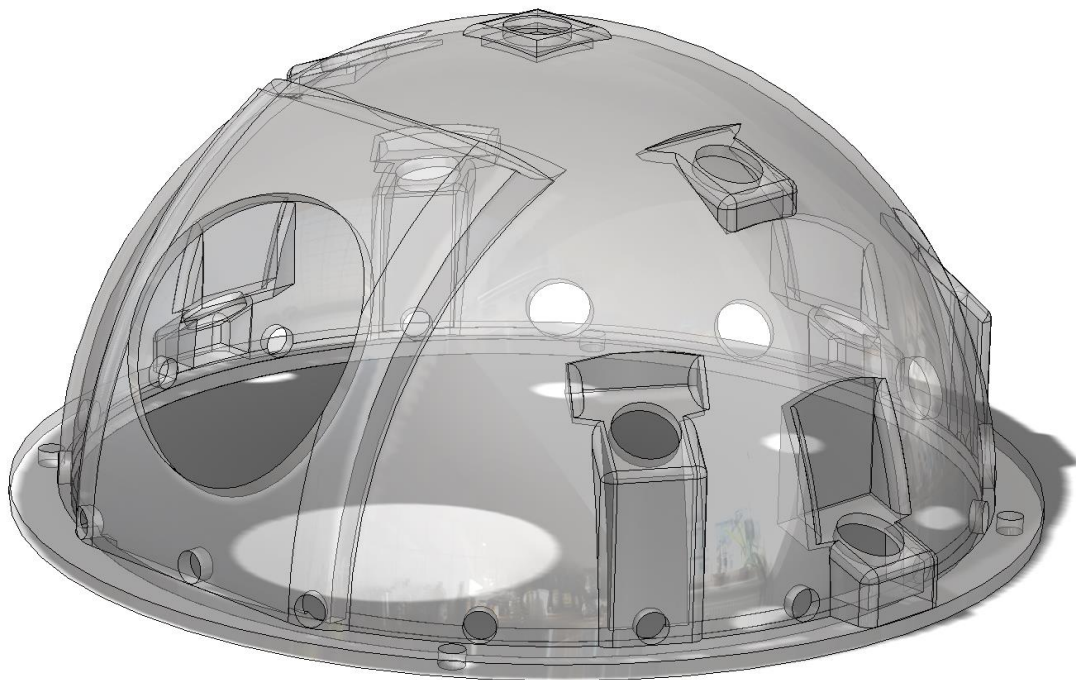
CAD model of dome, showing jet mounting faces, air holes and vacuum mounting face.
